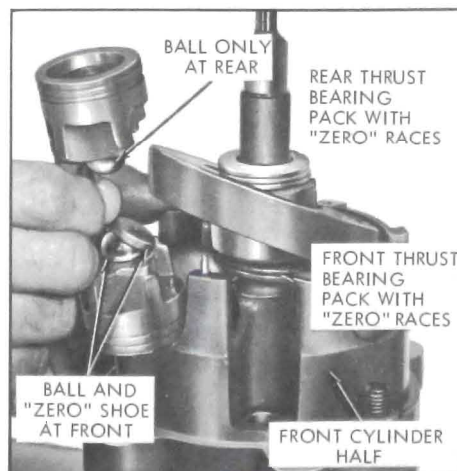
Installing Piston Assembly in Cylinder for Gauging
